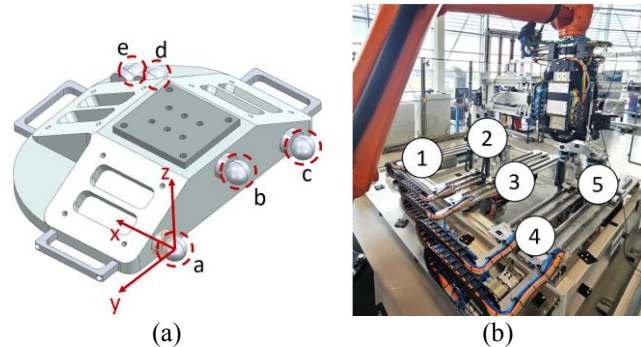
Locations of (a) the common datum and SMRs (a-e) on the fixture; and (b) the fixture at different drilling locations (1-5) – with 1 being the location for the fixture when defining the common datum.
